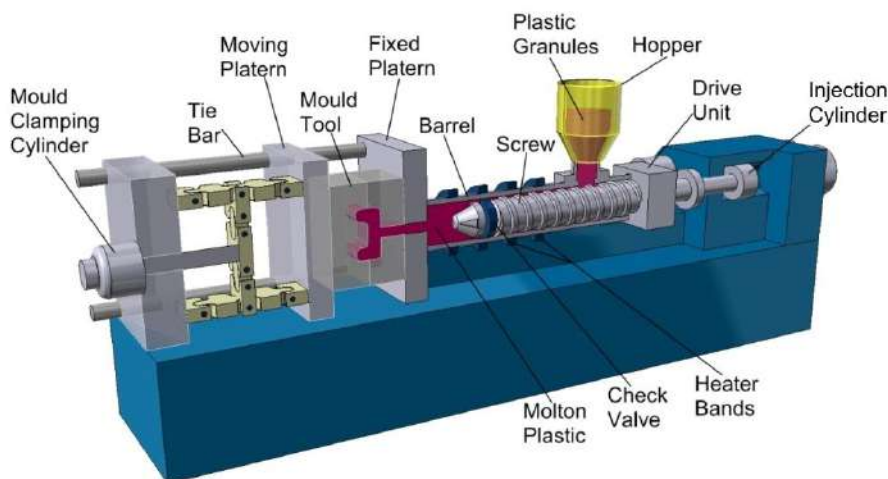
Injection moulding is used in the manufacture of countless plastic products. Chairs, toys, pens, rulers, keyboards
